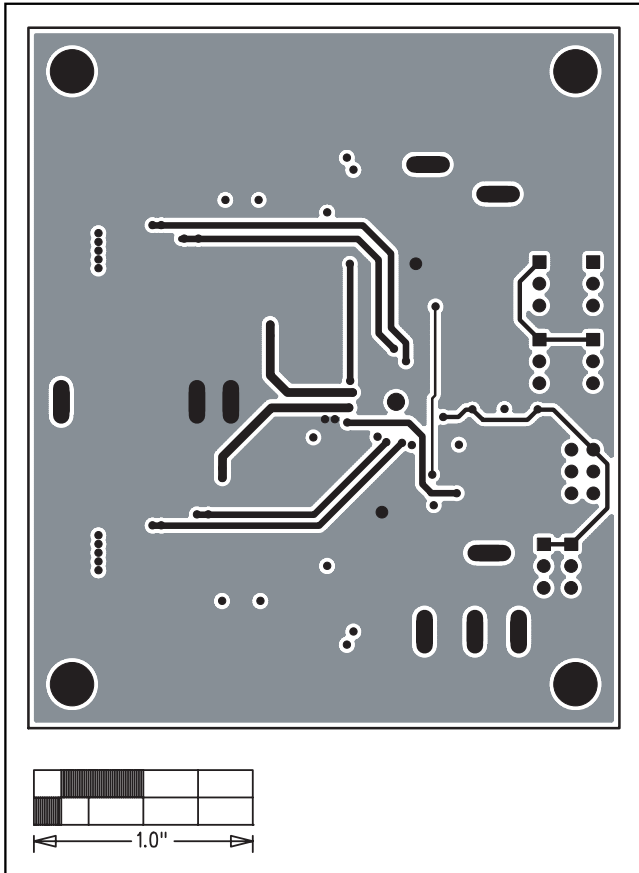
MAX1533 EV Kit PC Board Layout—Layer 2
